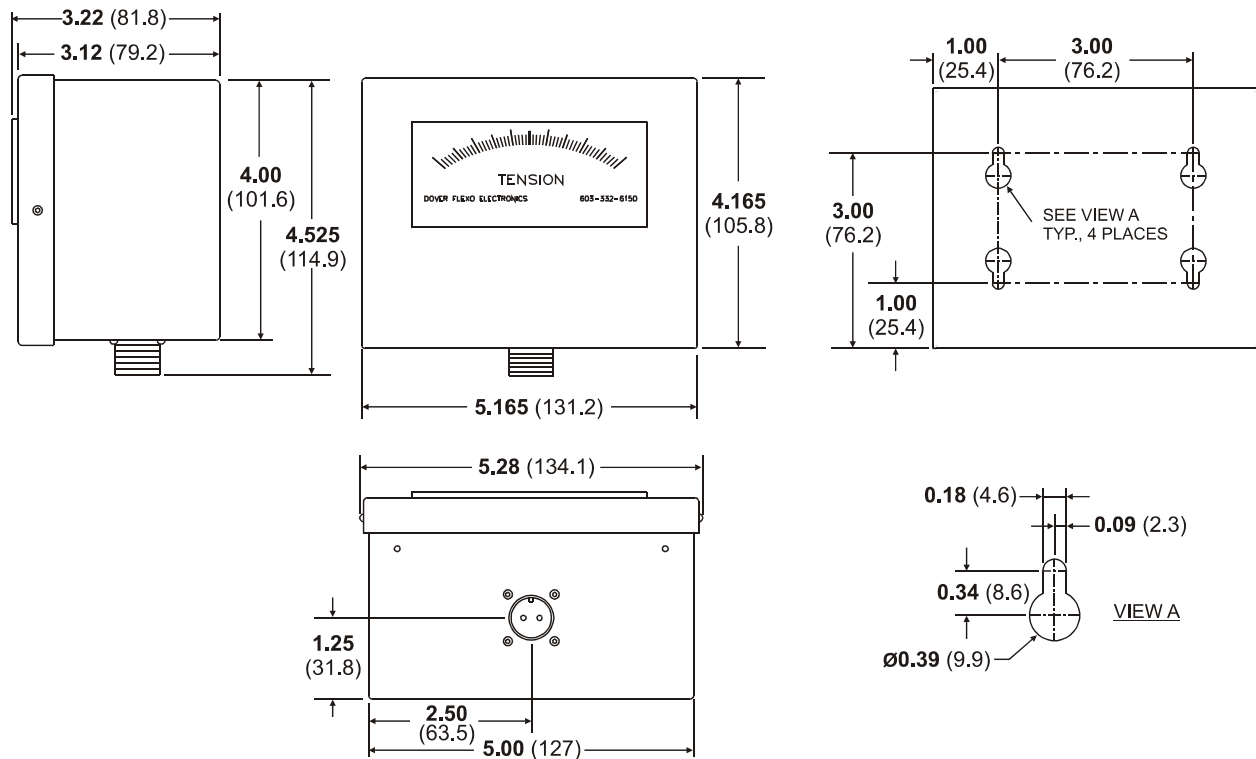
ACCESSORY TENSION METER ENCLOSURE DIMENSIONS (DFE P/N 723-2682)
